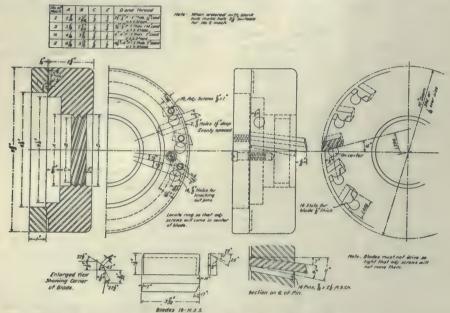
Ten-inch Blade Face Mill for High Power Machines.
